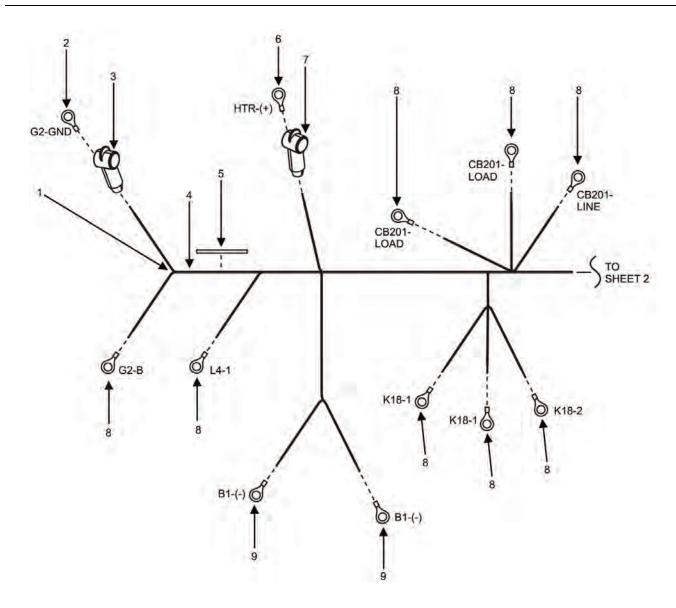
Power Wiring Harness (Sheet 1 of 2).
